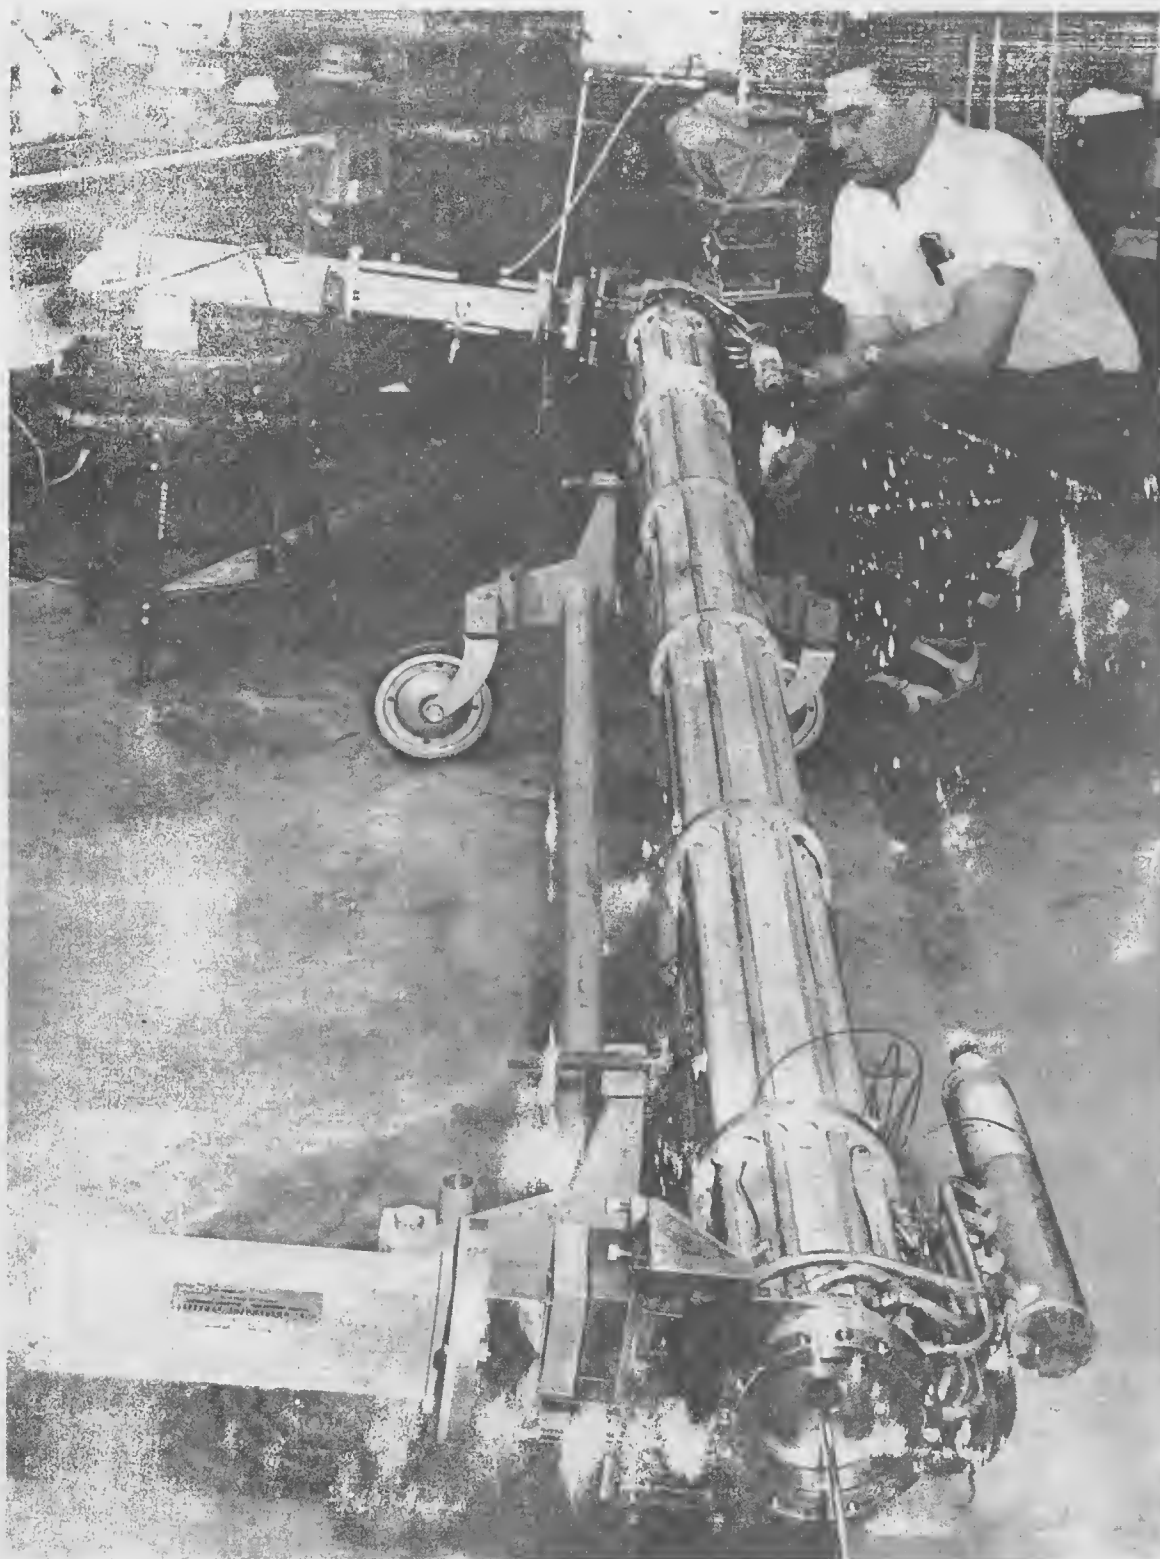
Flight Tube Constant Structure Test Section with a Single Manifold at Each End.
